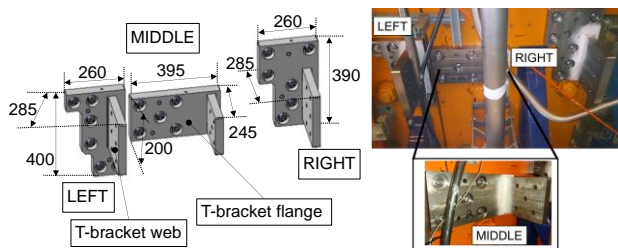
Left: Models of the three limb brackets with key dimensions in millimetres. Right: Photos taken after the limb brackets were installed.
